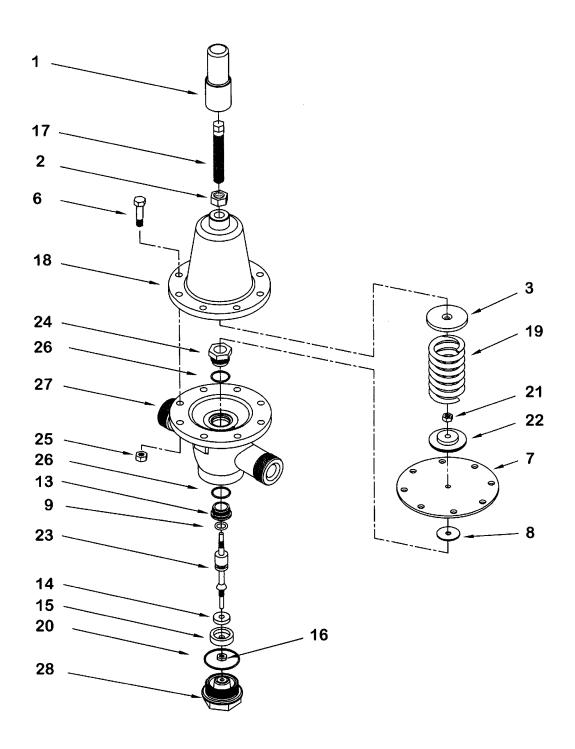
EXPLODED VIEW – TYPICAL 1/2" THROUGH 1-1/2" VALVE ASSEMBLY
